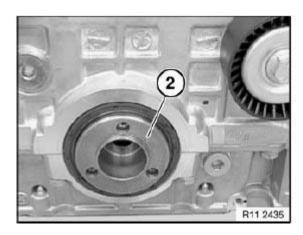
Identifying Radial Seal Hub Courtesy of BMW OF NORTH AMERICA, INC.
